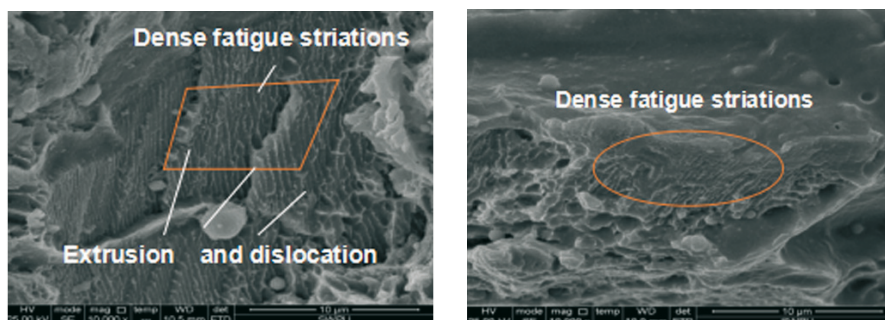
Microscopic process of fatigue crack initiation in the baseplate
